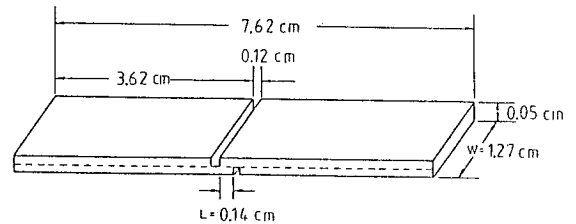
Dimension of specimen for the interlaminar shear test in compression mode with the supporting fixture
